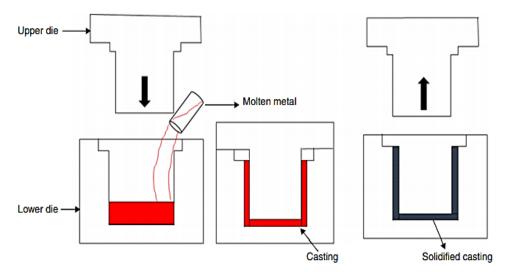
9 Squeeze Casting Manufacturing Process [8]
